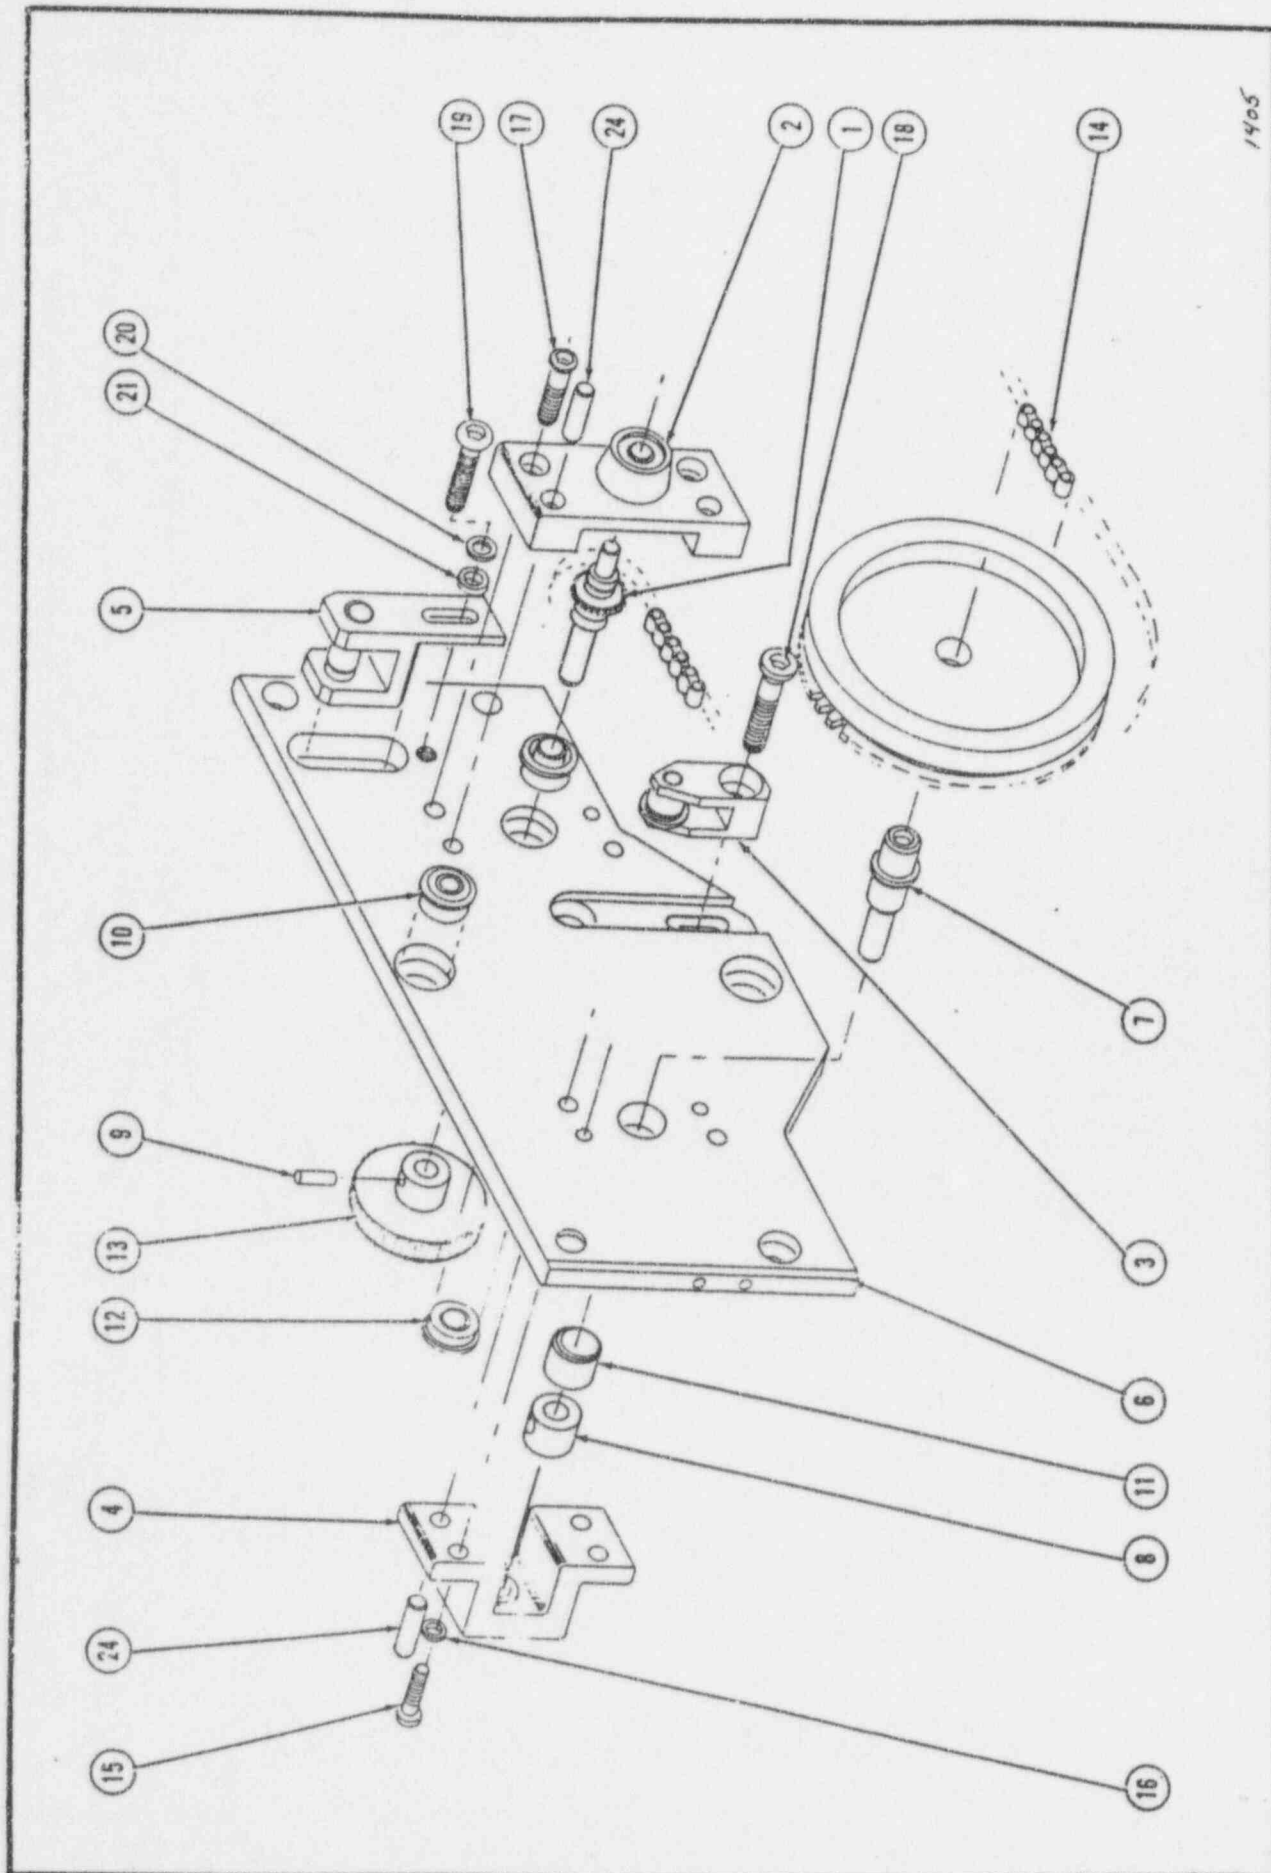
LOCALIZER MOUNTING BRACKET - Part No. 182250
